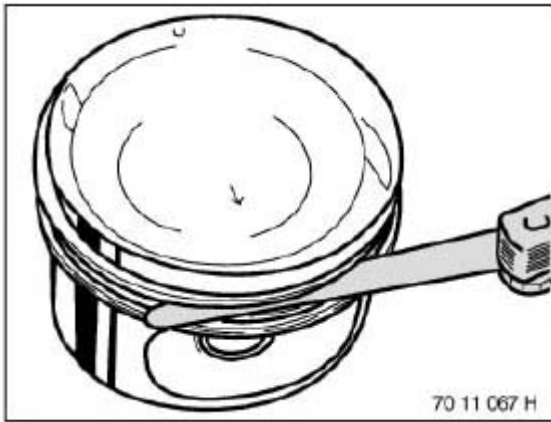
Measuring Axial Clearance Of Piston Rings In Piston Ring Groove
